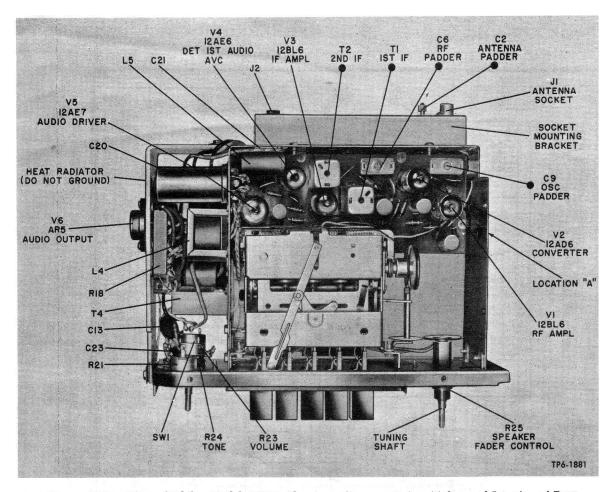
Top View of Philco Model C5705, Showing Alignment Points, Tubes, and Location of Parts
